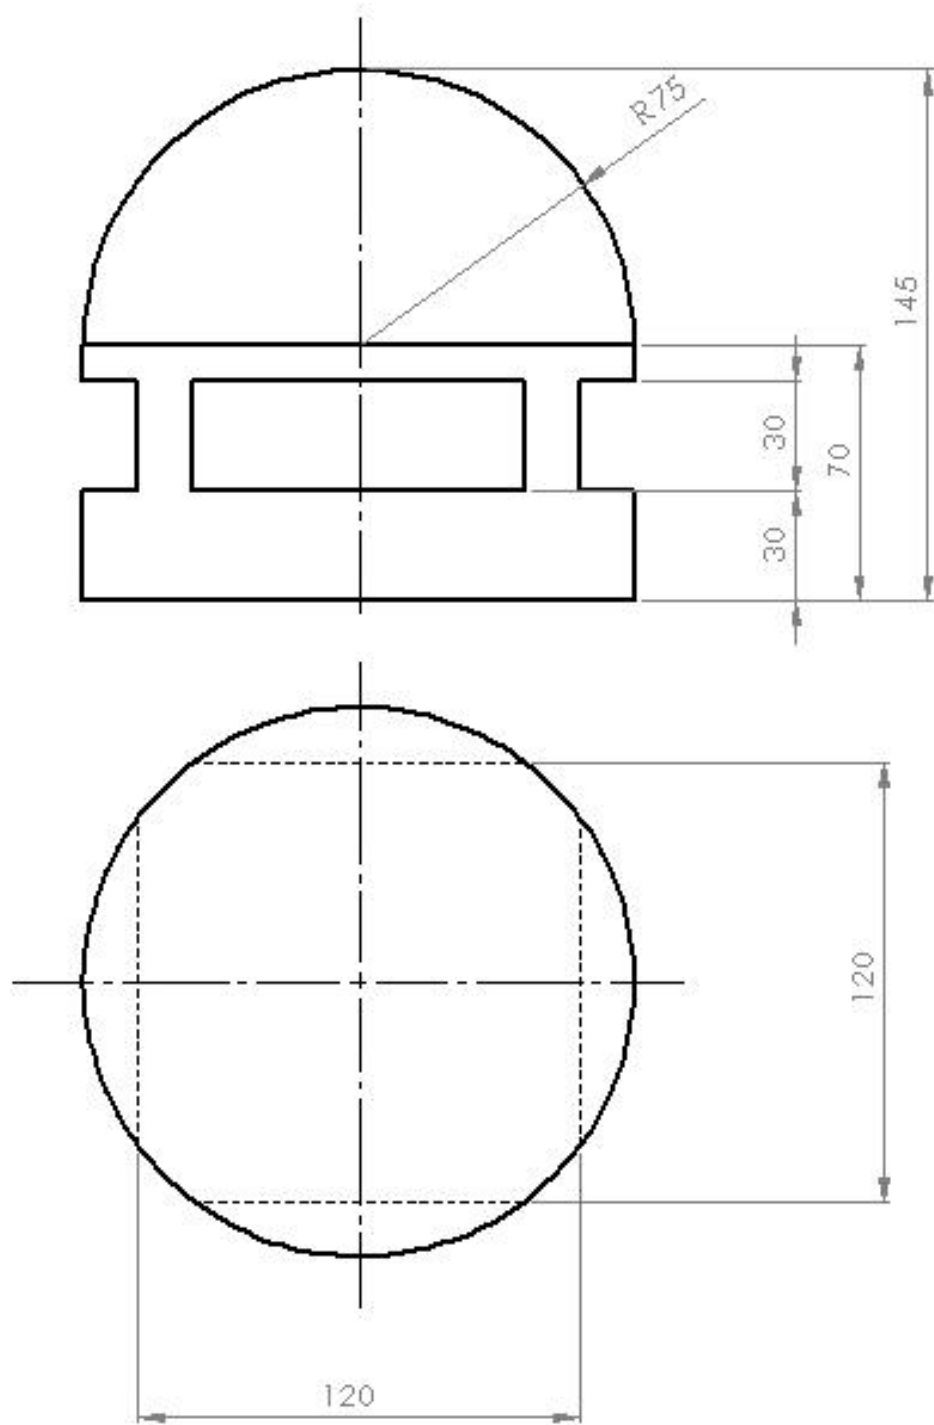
Detail drawing of hemispherical form. Dimensions shown are as designed but as machined dimensions are detailed in the main report.
